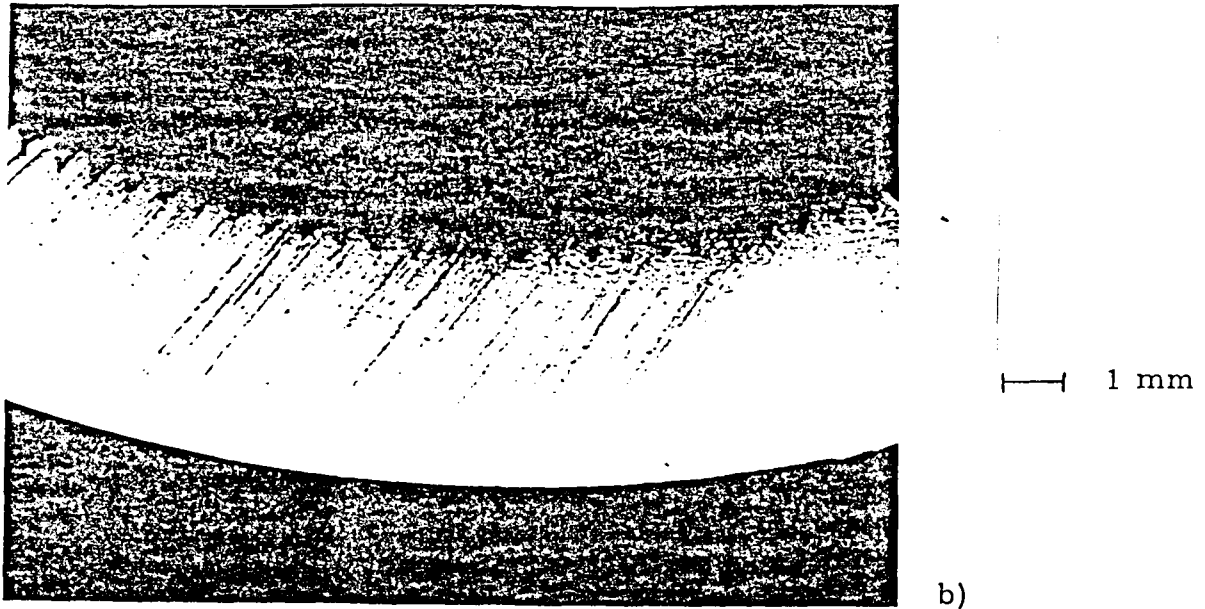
/4(b): Groove Profile of the Two Grooved Tubes.
